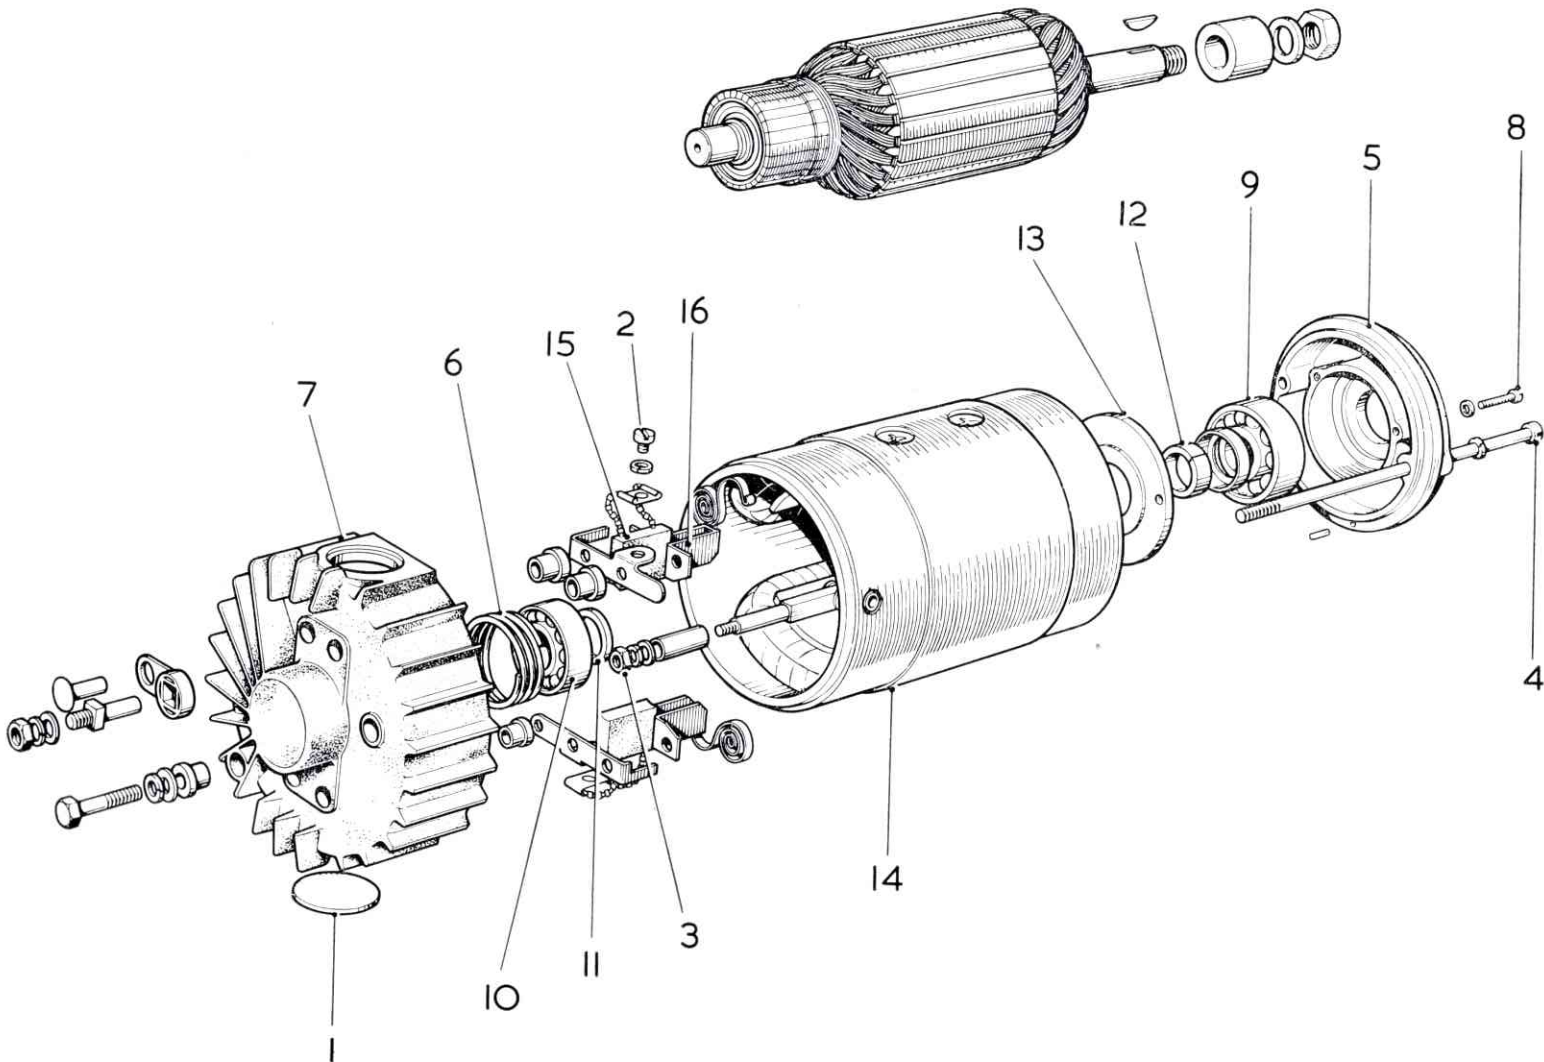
EXPLODED VIEW OF THE DYNAMO
